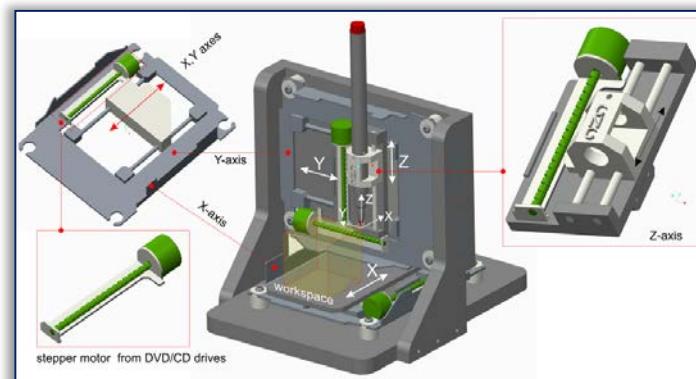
CAD model of the table 3-axis mini CNC machine tool with basic components
